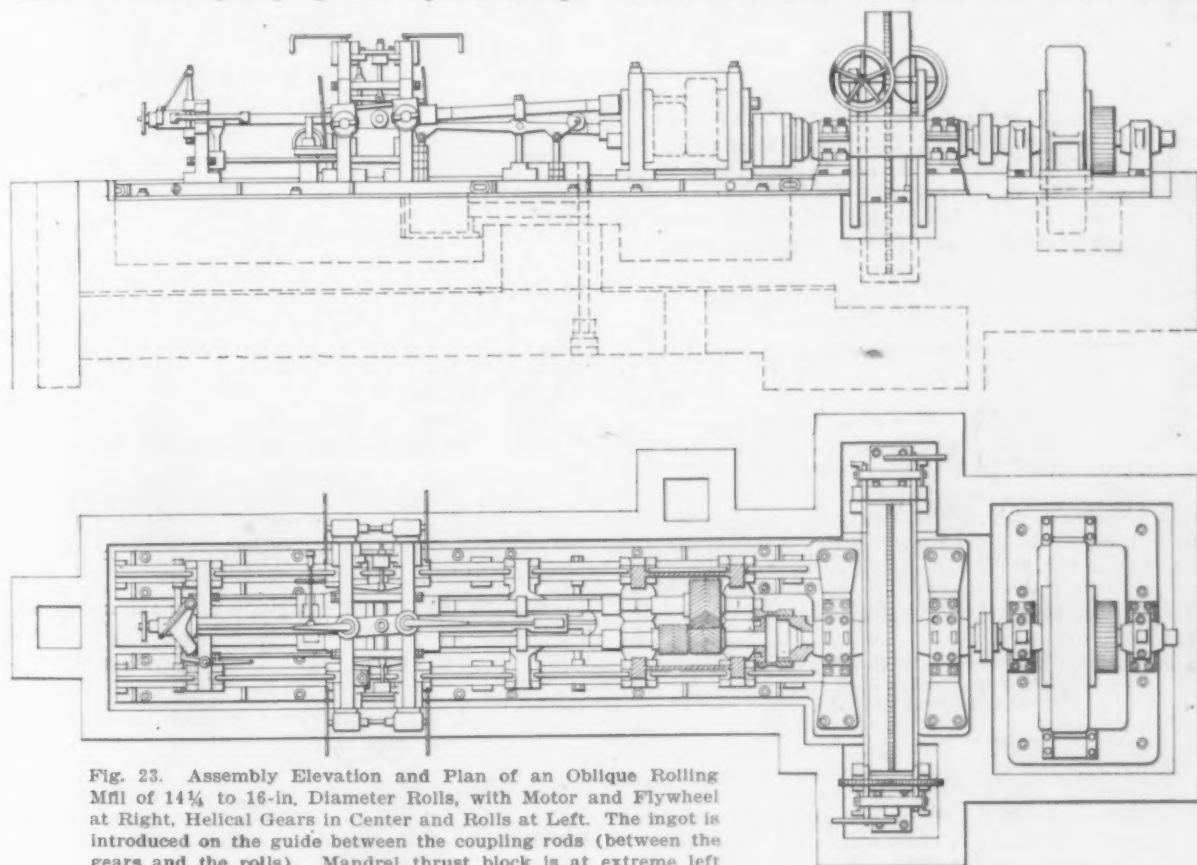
Assembly Elevation and Plan of an Oblique Rolling Mill of 14 $\frac{1}{4}$ to 16-in. Diameter Rolls, with Motor and Flywheel at Right, Helical Gears in Center and Rolls at Left. The ingot is introduced on the guide between the coupling rods (between the gears and the rolls). Mandrel thrust block is at extreme left
